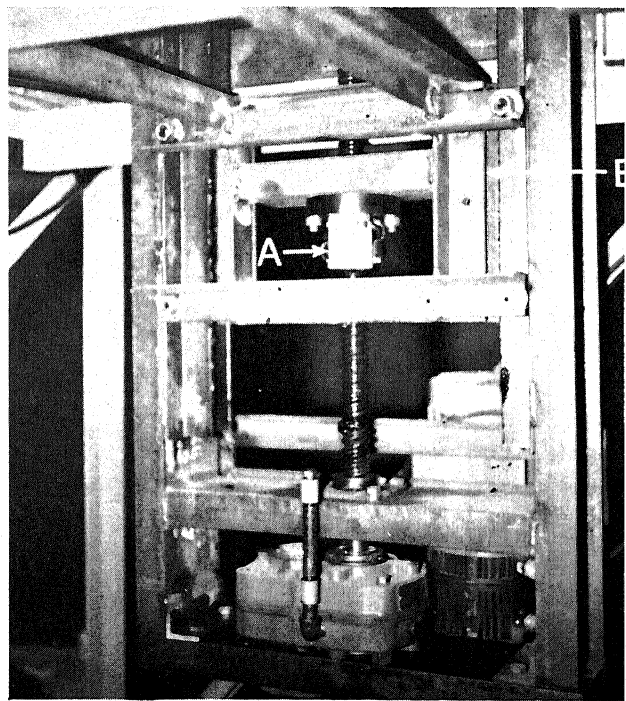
The nut of the ball-bearing screw (A) is bolted to the lift platform (B).
